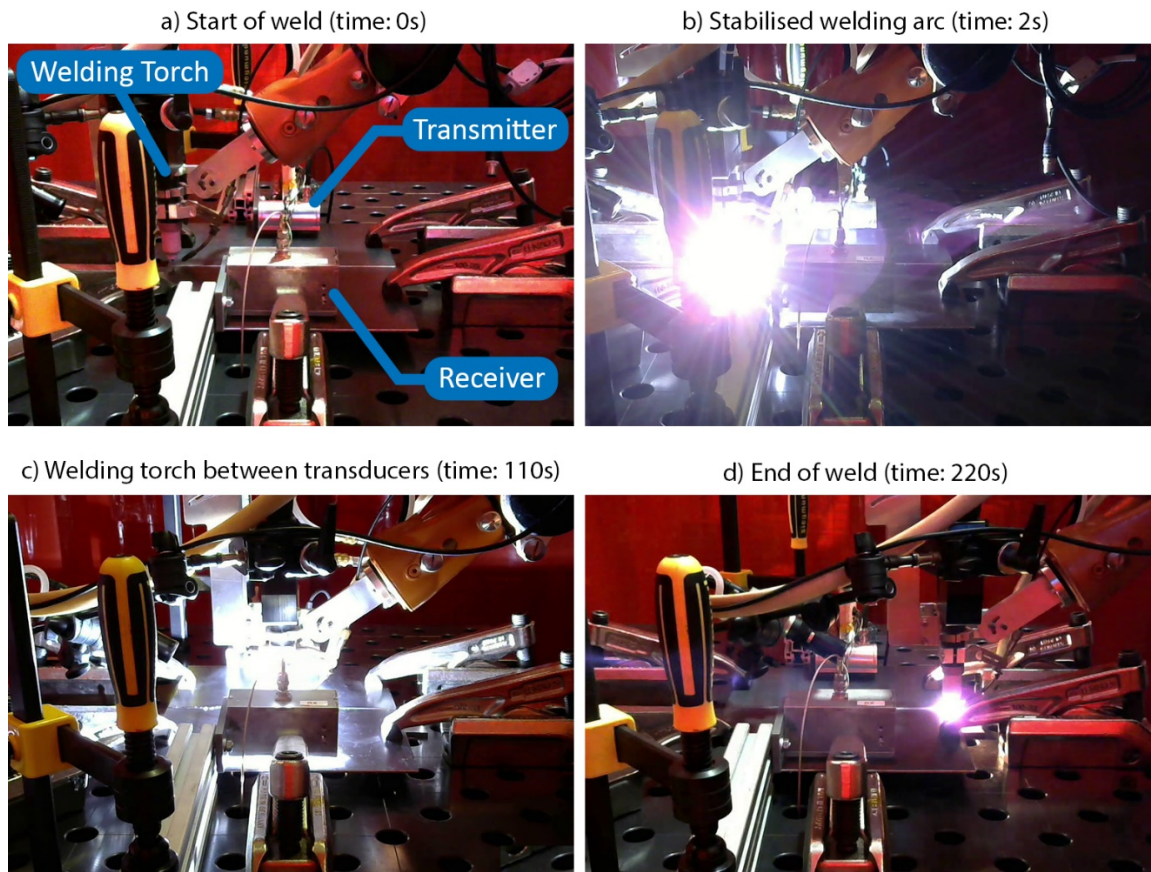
Video frame stills from welding trials with in-process non-contact ultrasonic screening.
